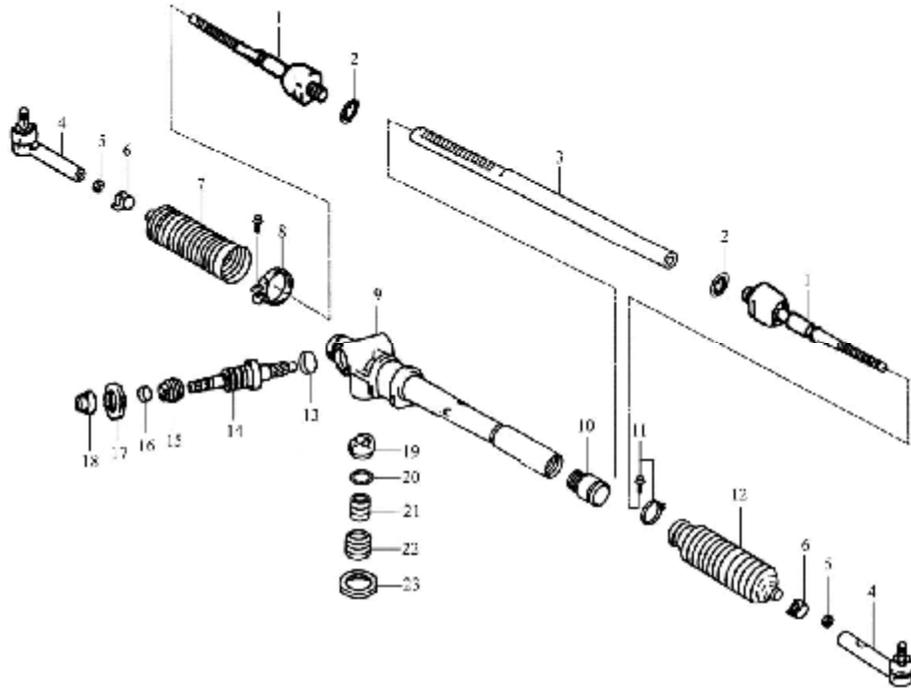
Steering Gear-2 (Mechanical Steering Gear)
